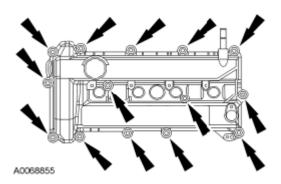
Locating Valve Cover Retainers Courtesy of FORD MOTOR CO.
